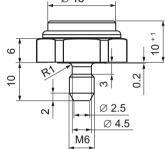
Dimensional drawing of MDS D525 All dimensions in mm
